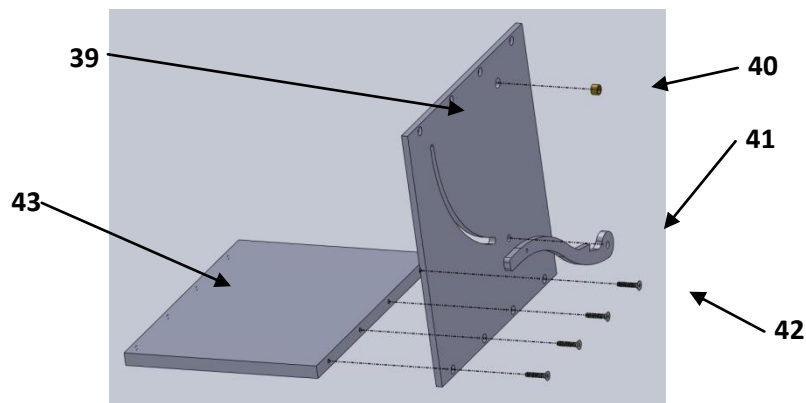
Chassis Assembly [1 of 4] (L) – (39, 40, 41, 42, 43)
